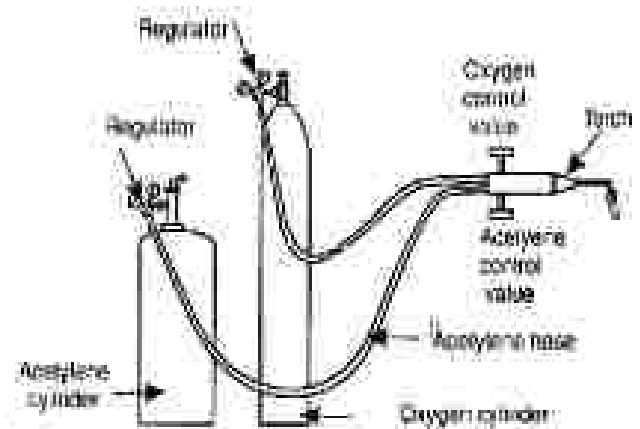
Oxy-acetylene welding equipment.
